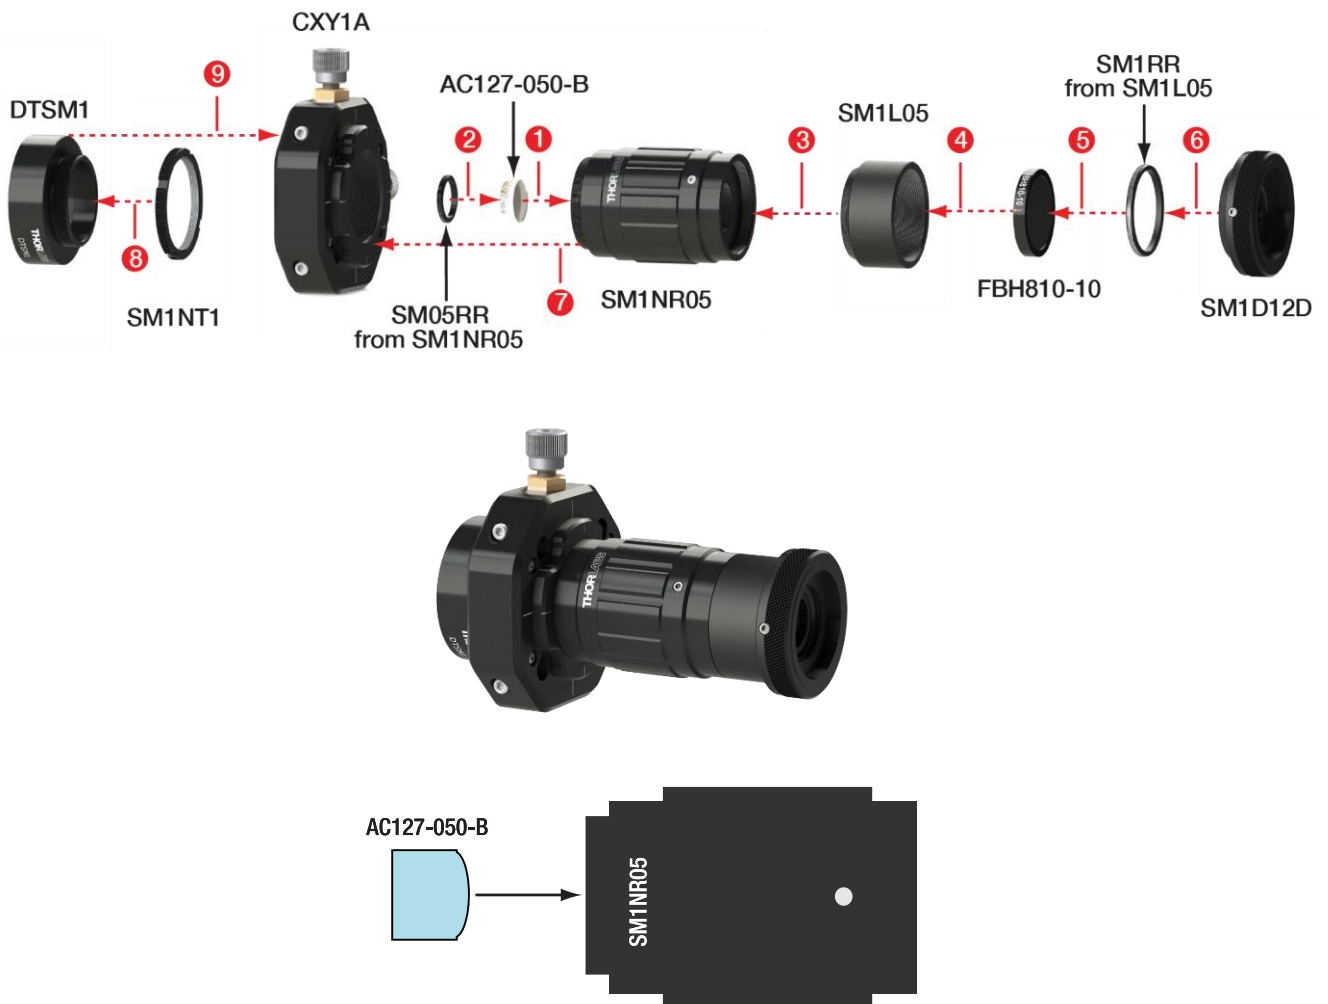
Exploded View (Top) and Assembled (Middle) Detector Optics Component (Build Three). The correct orientation of AC127-050-B lens in SM1NR05 zoom housing is shown on the bottom.
